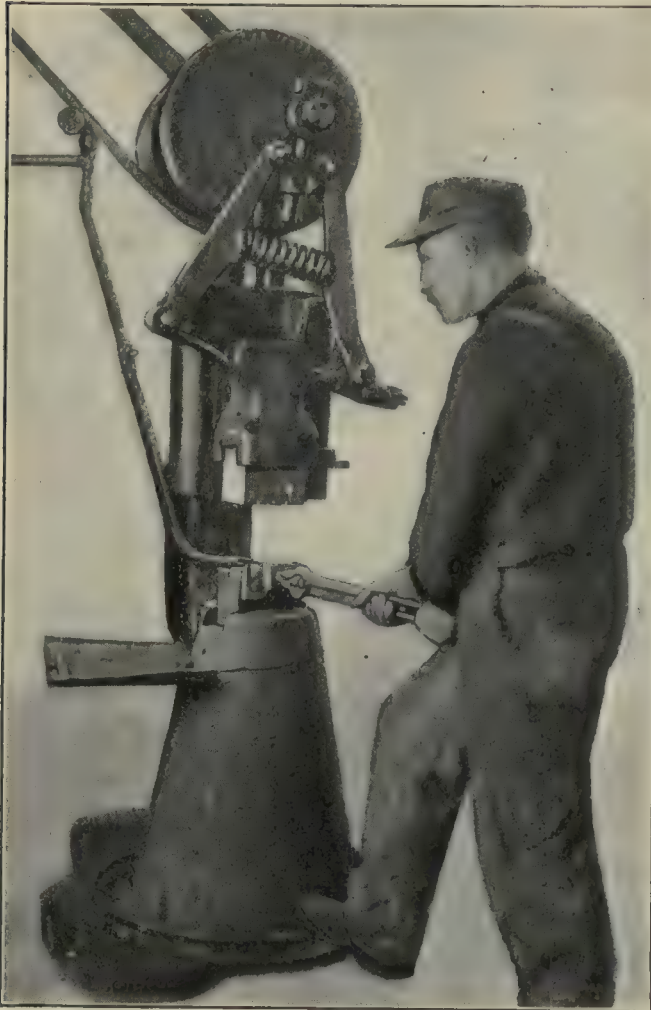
OPERATOR FORGING CHISEL SHANKS
